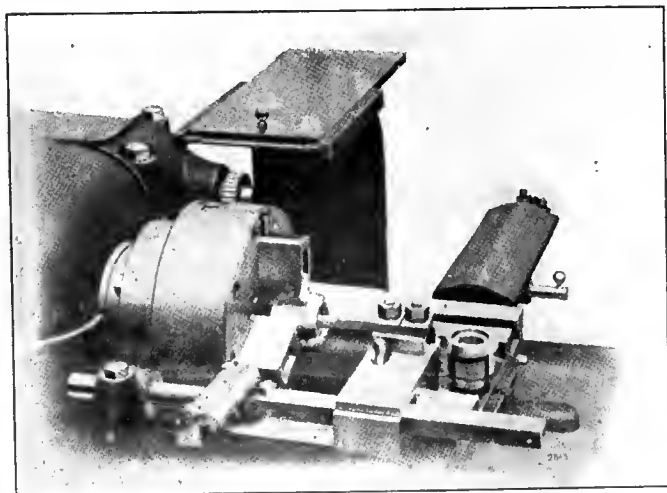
TAPER TURNING AND CHASING ATTACHMENT.
